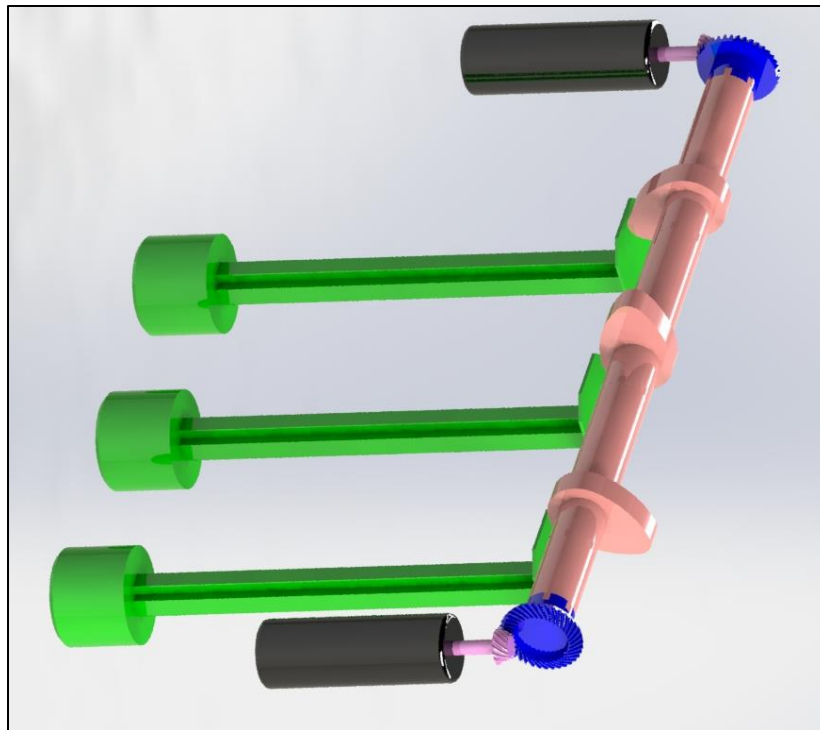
Isometric View of Camshaft Mechanism Without Denture
